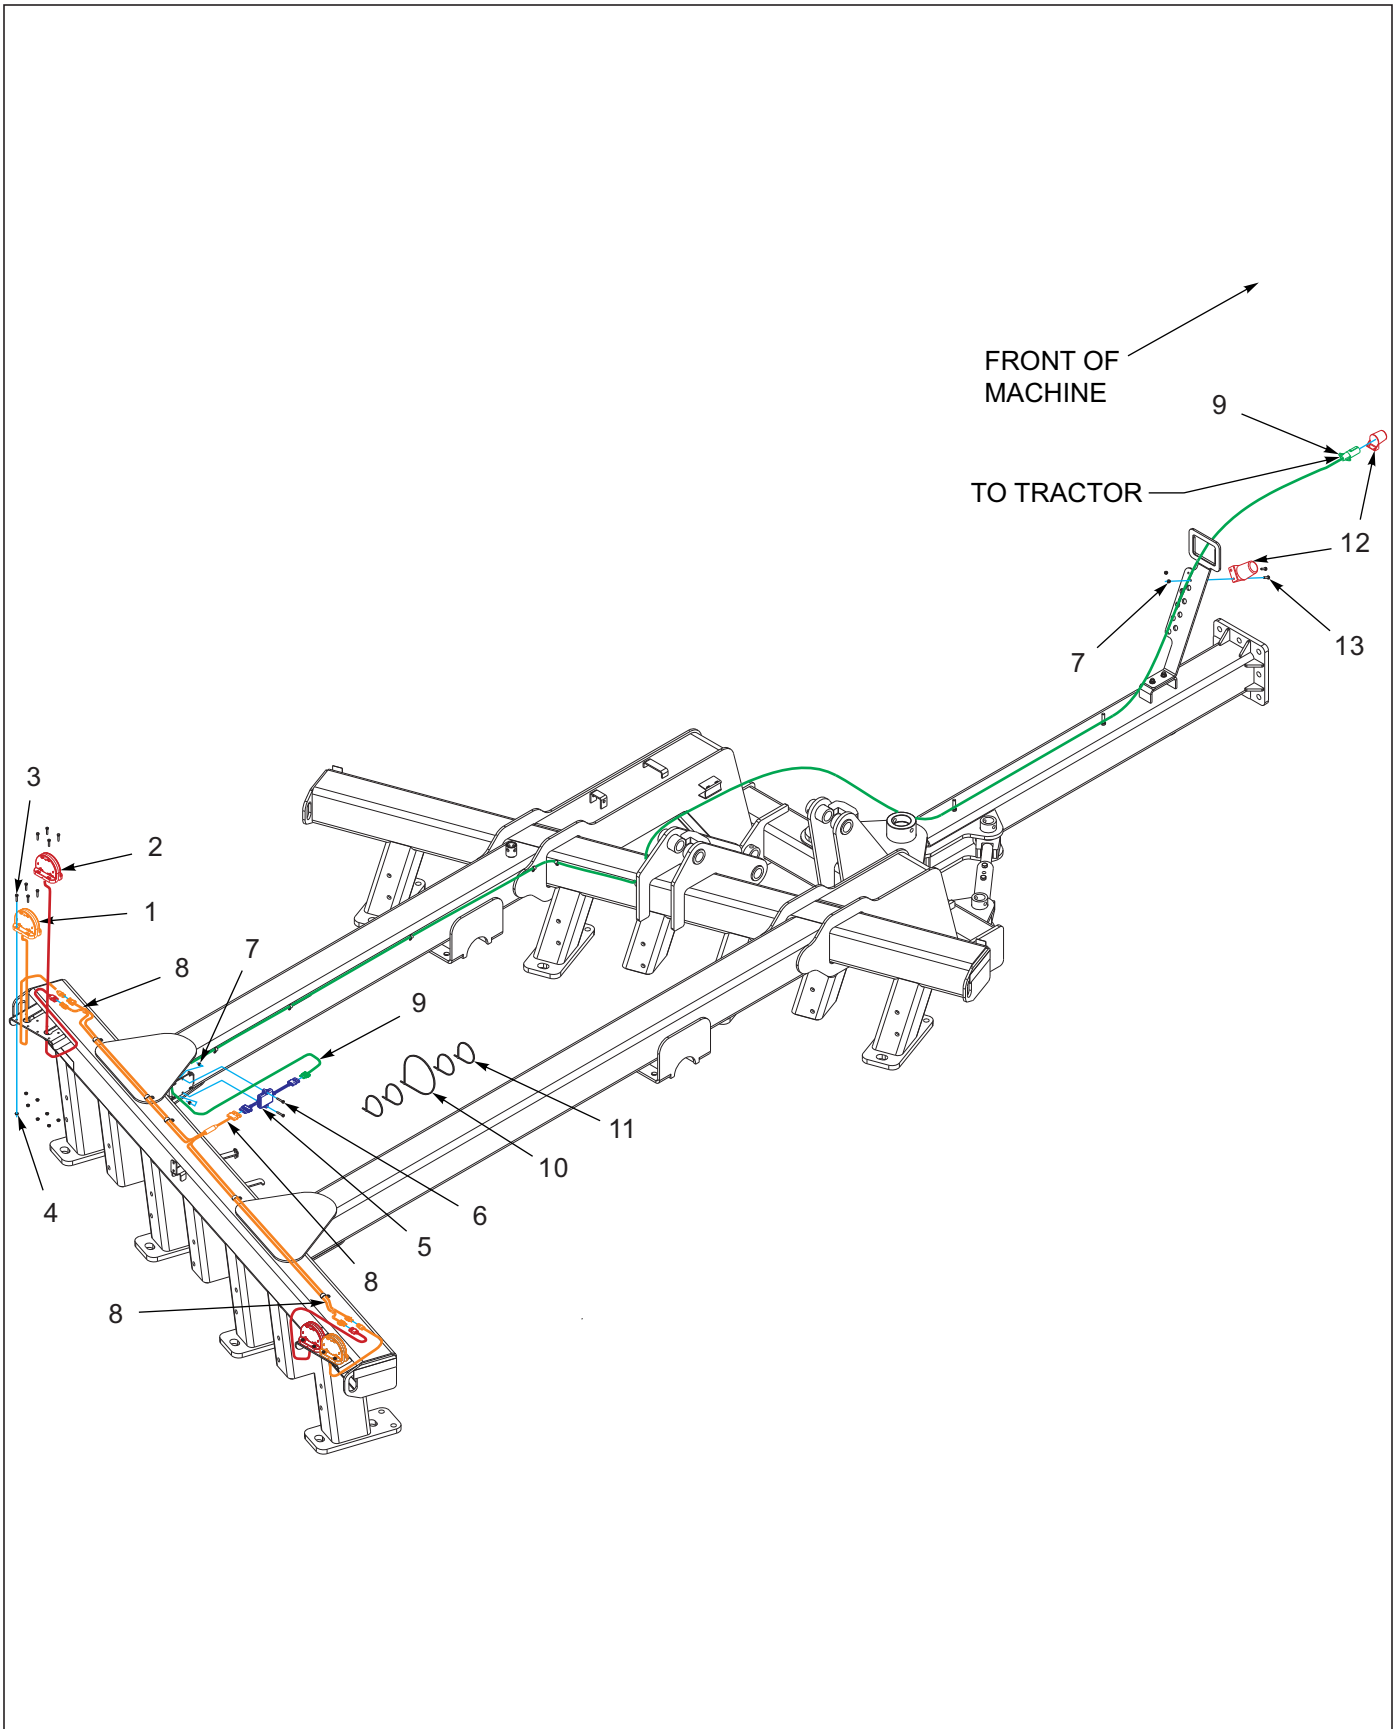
Electrical Assembly W/LED Lights (After 6-1-2016)
